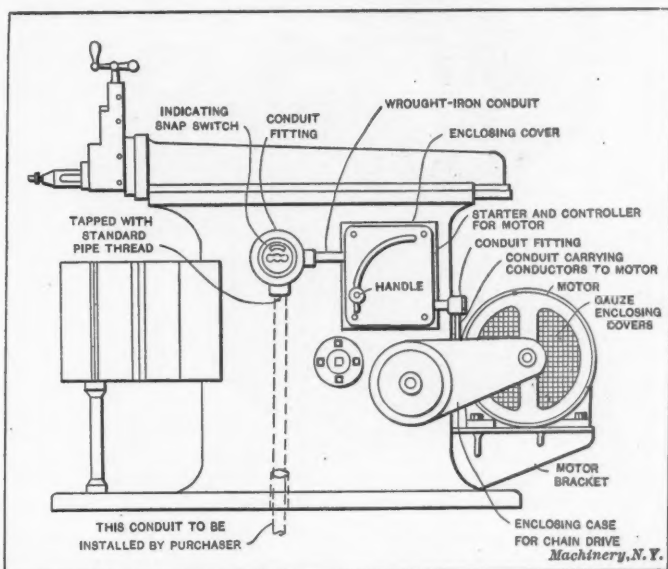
A Motor-driven Shaper with Completely Enclosed Wiring
